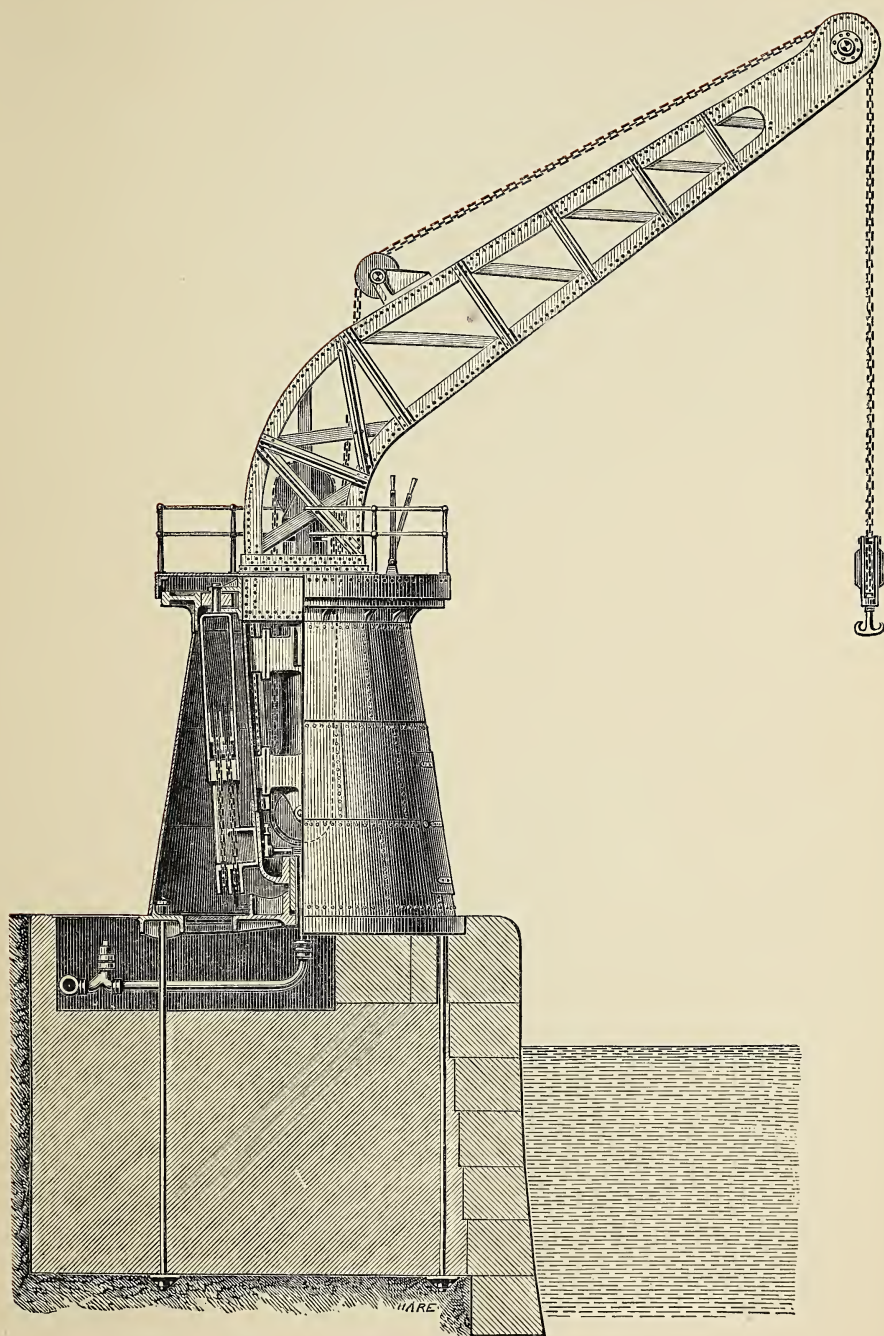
Section of the working parts of a Hydraulic Crane.
